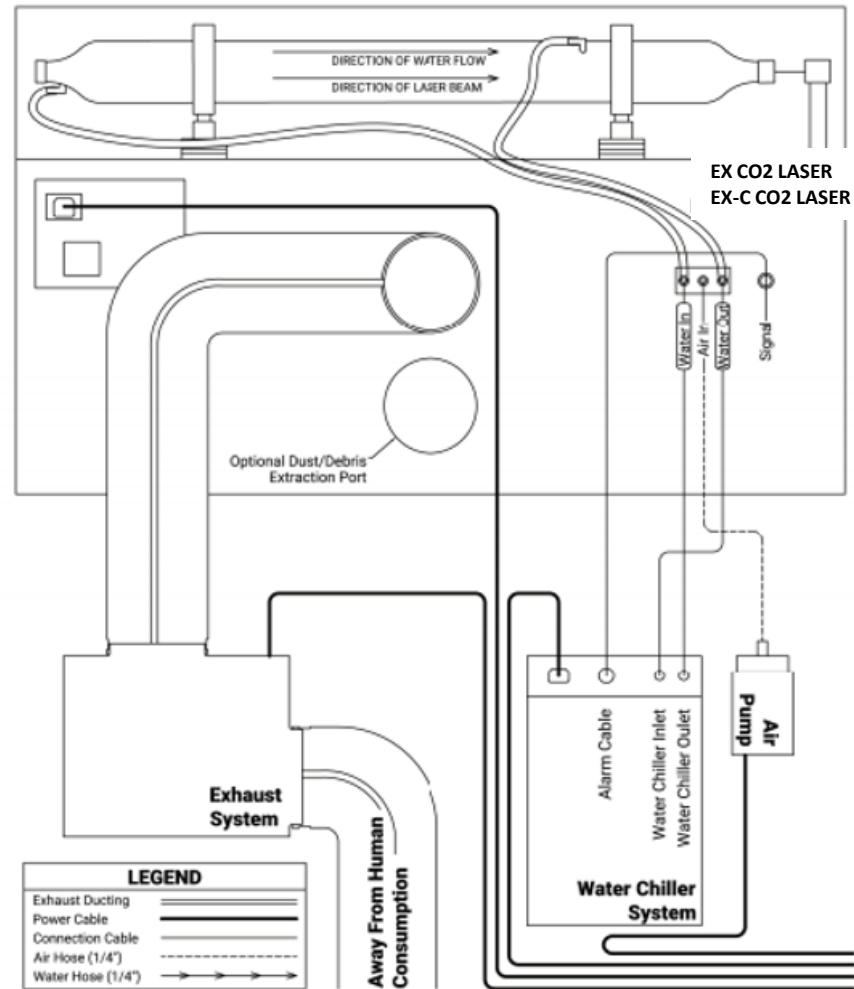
Smartshop Laser/EX/EX-C Series CO2 Laser Machine.
